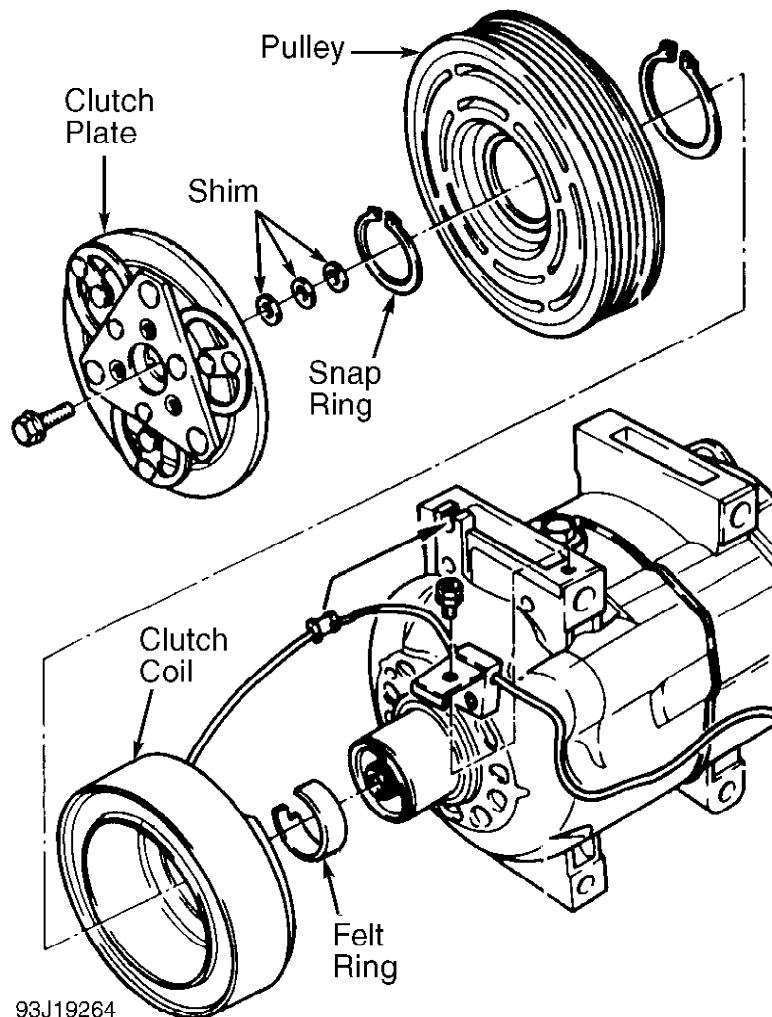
Exploded View Of Compressor (Zexel 6-Cylinder)
